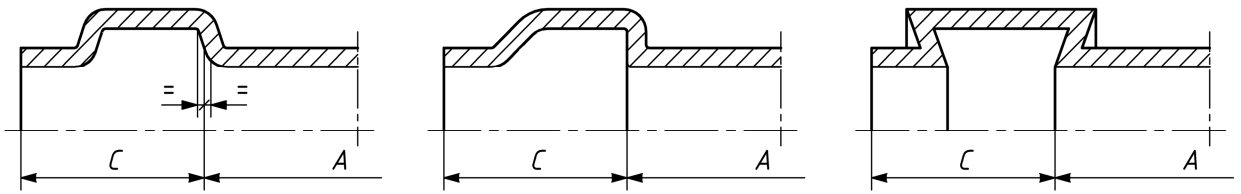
Typical groove designs for elastomeric ring seal sockets
